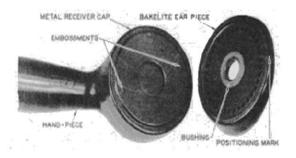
View Showing Receiver End of Handset with Ear Piece Removed
